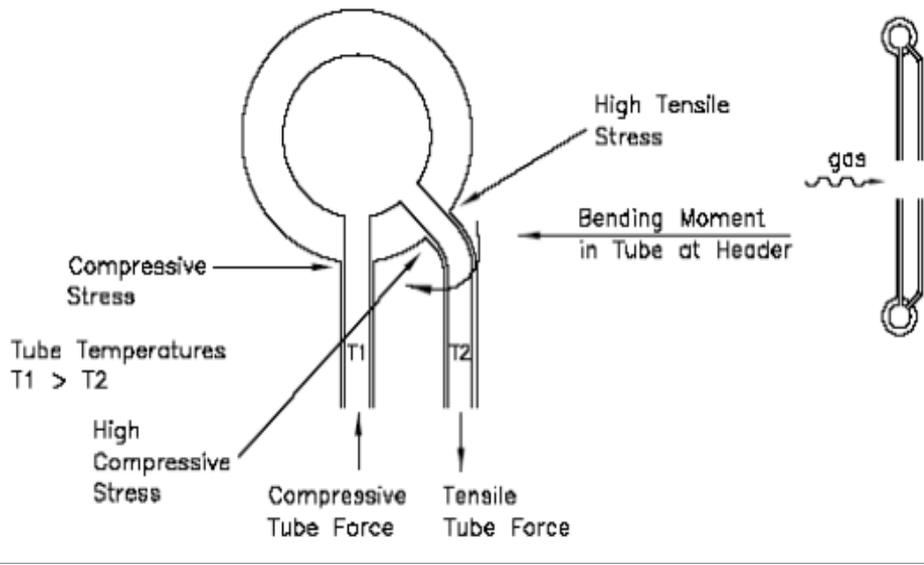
Thermal fatigue cracking of tube-to- header welds in horizontal gas path HRSG
